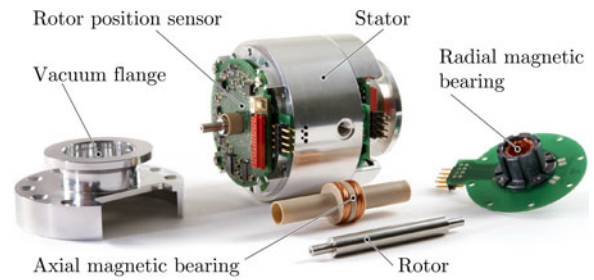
Photo of the implemented self-bearing machine prototype with dismantled rotor, axial, and radial magnetic bearing.
